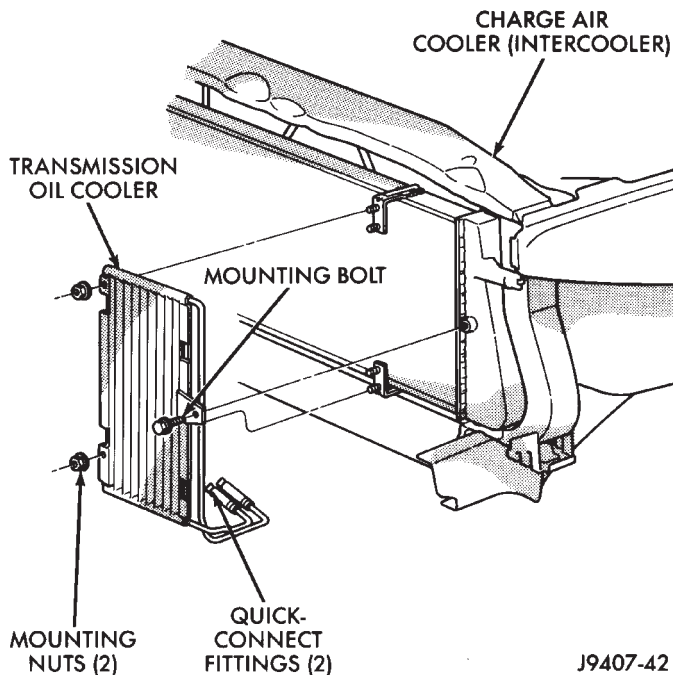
Auxiliary Transmission Oil Cooler—Diesel Engine
